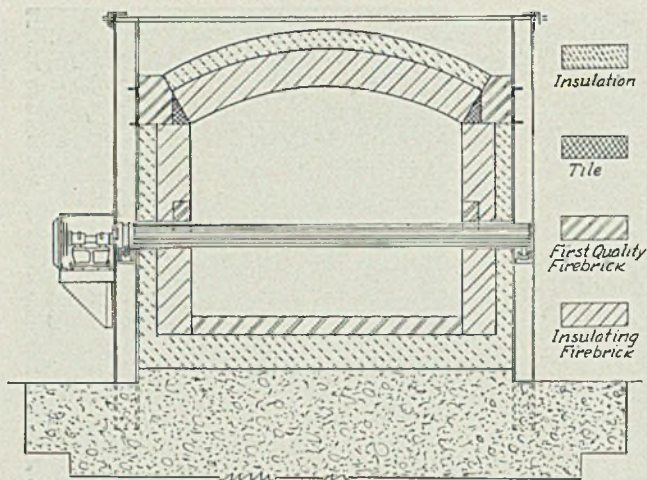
A cross-section of the furnace looking through it from the discharge end. The chain and sprocket roller drive is shown on the left-hand side. The rollers are mounted on grindstone bearings
